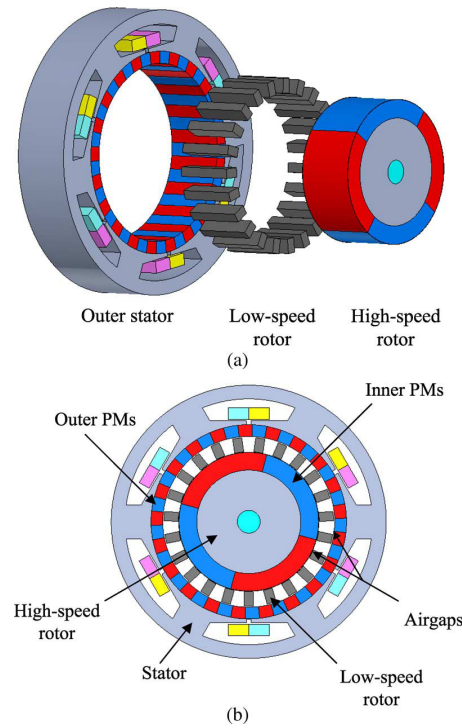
Integrated magnetic gear and PM brushless machine (ref. [20])
